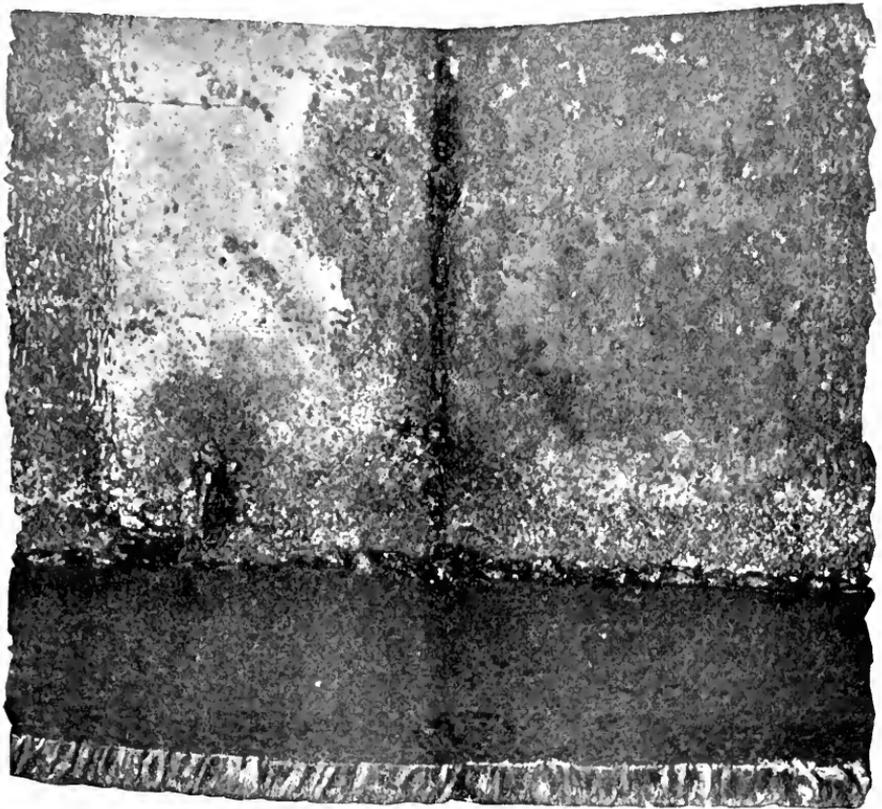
WELDING OF HEAD TO SHELL. NOTE THE ROUGH CHARACTER OF THE WORK.
